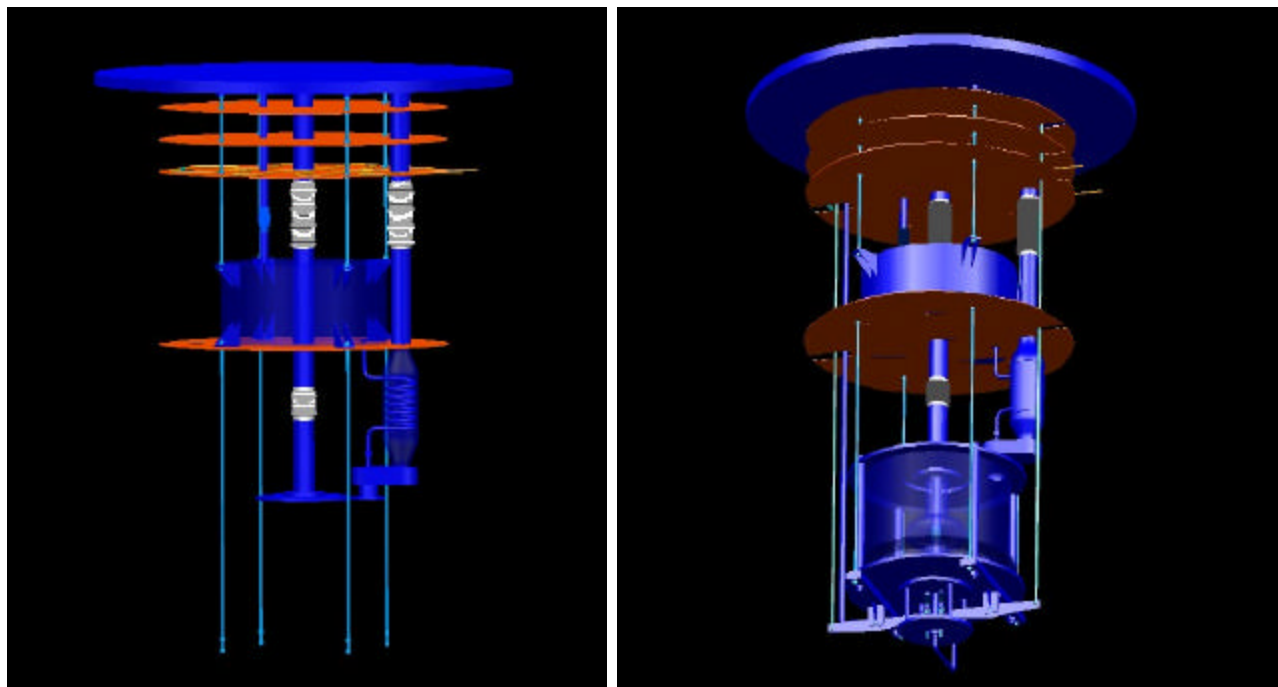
Insert assembly without (left) and with (right) host cavity cryostat.
